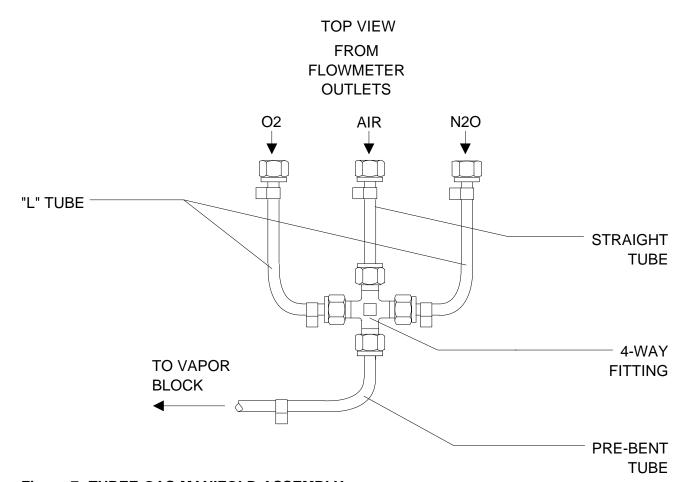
THREE-GAS MANIFOLD ASSEMBLY
